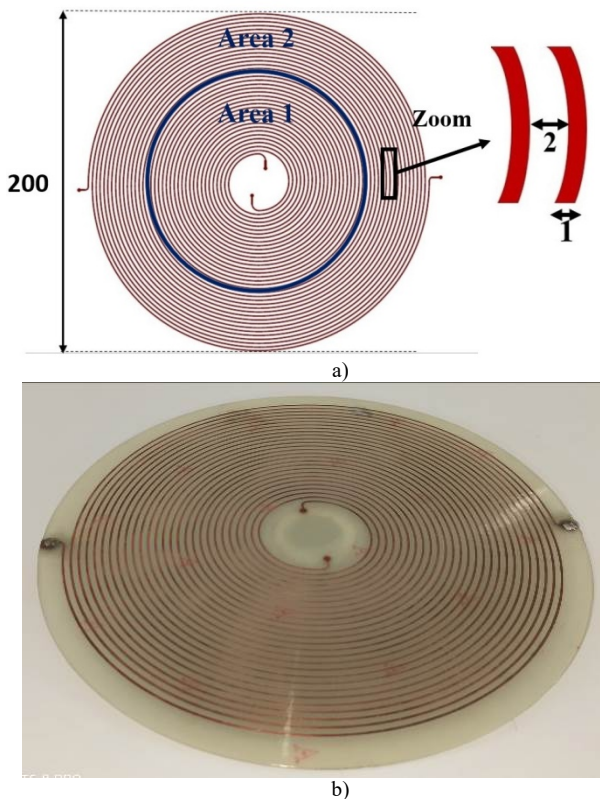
The rotating ECB device : (a) Dimensions of the ECB in millimeter ; (b) Photography of the ECB.
